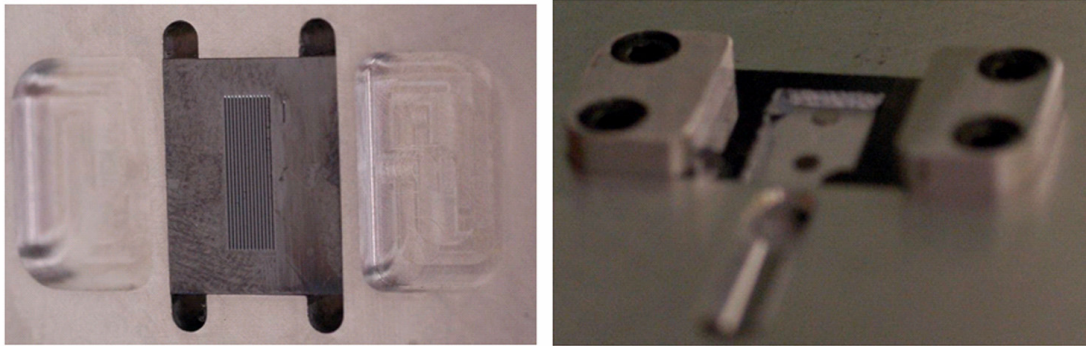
Silicon mold inserts installed in aluminum mold - Groove insert (left) and Top trapezoidal shape insert (right)
